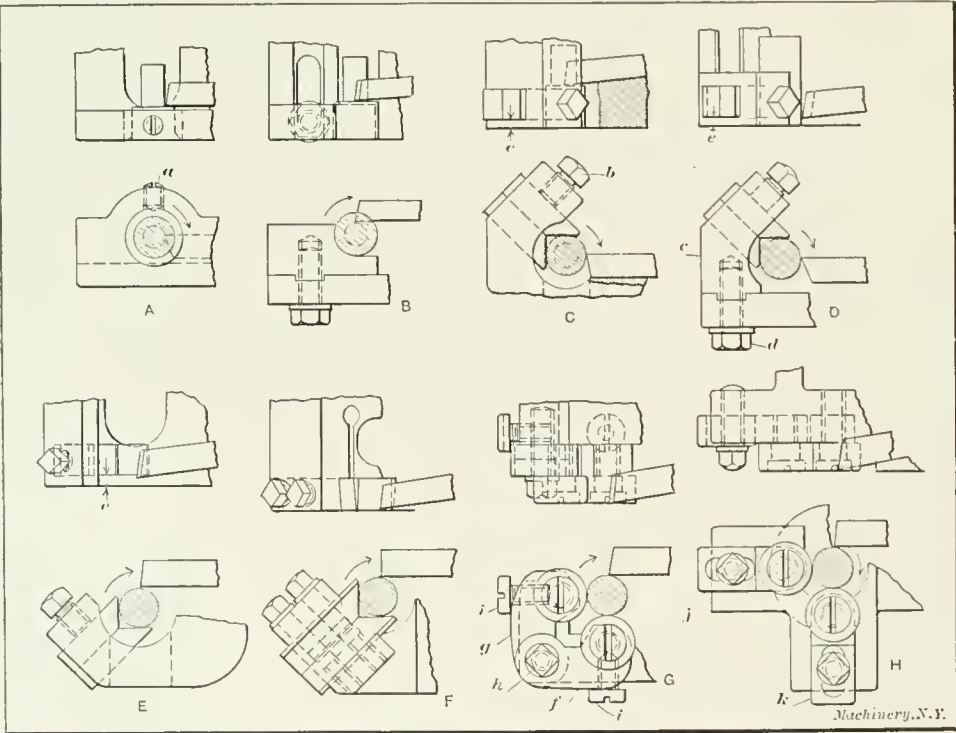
Methods of Holding and Adjusting Box-tool Supports
